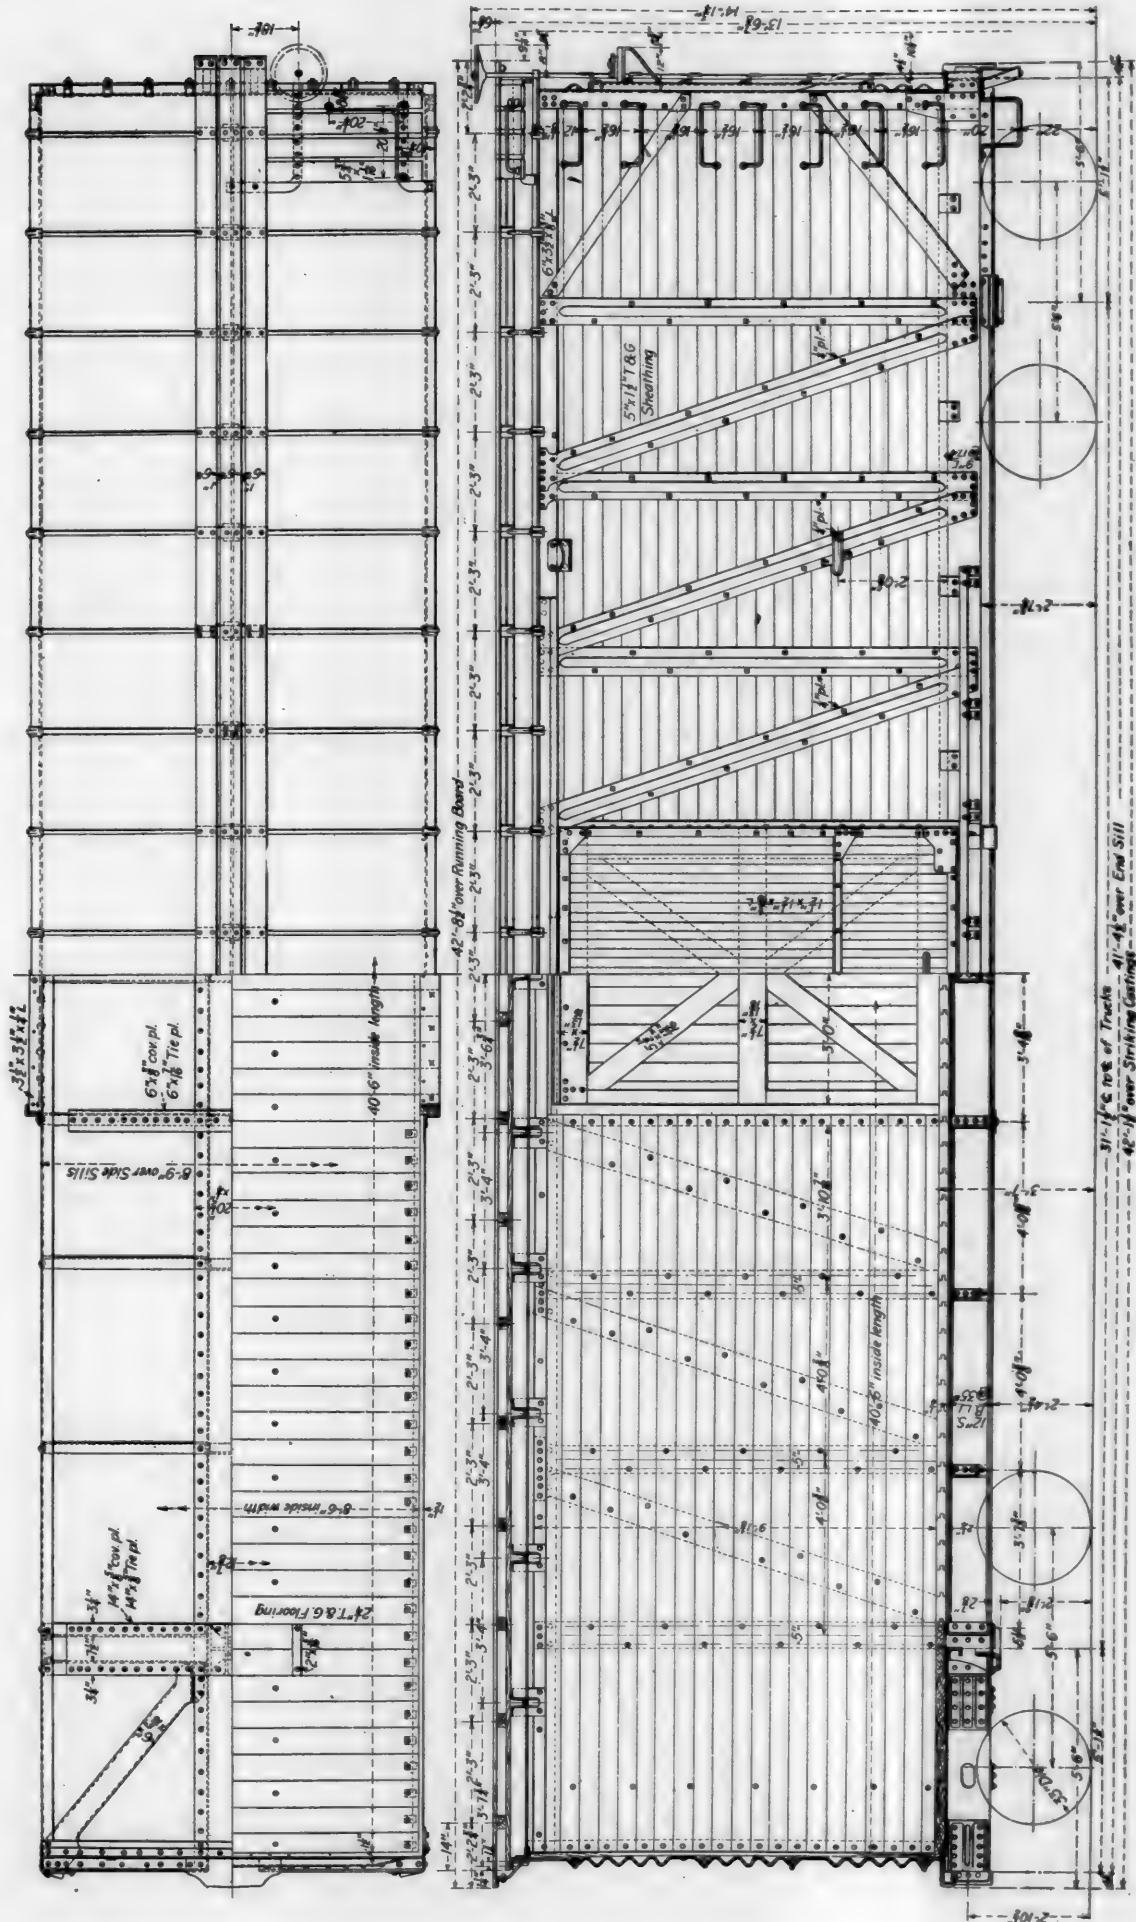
General Plan for the Standard 40- and 50-Ton Steel Frame, Single Sheathed Box Car
